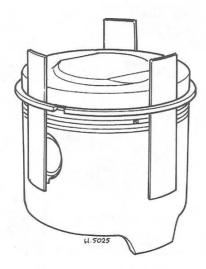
Method of freeing gummed piston rings (Sec 14)
